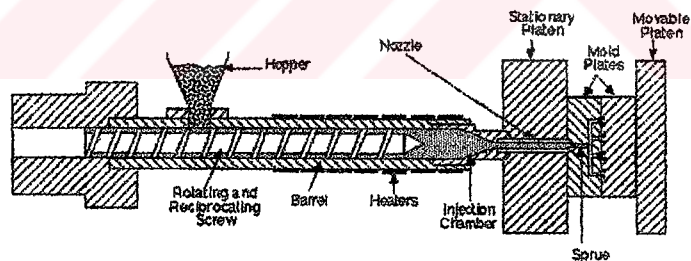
Components of a Single Screw Injection Moulding Machine for Thermoplastics.
